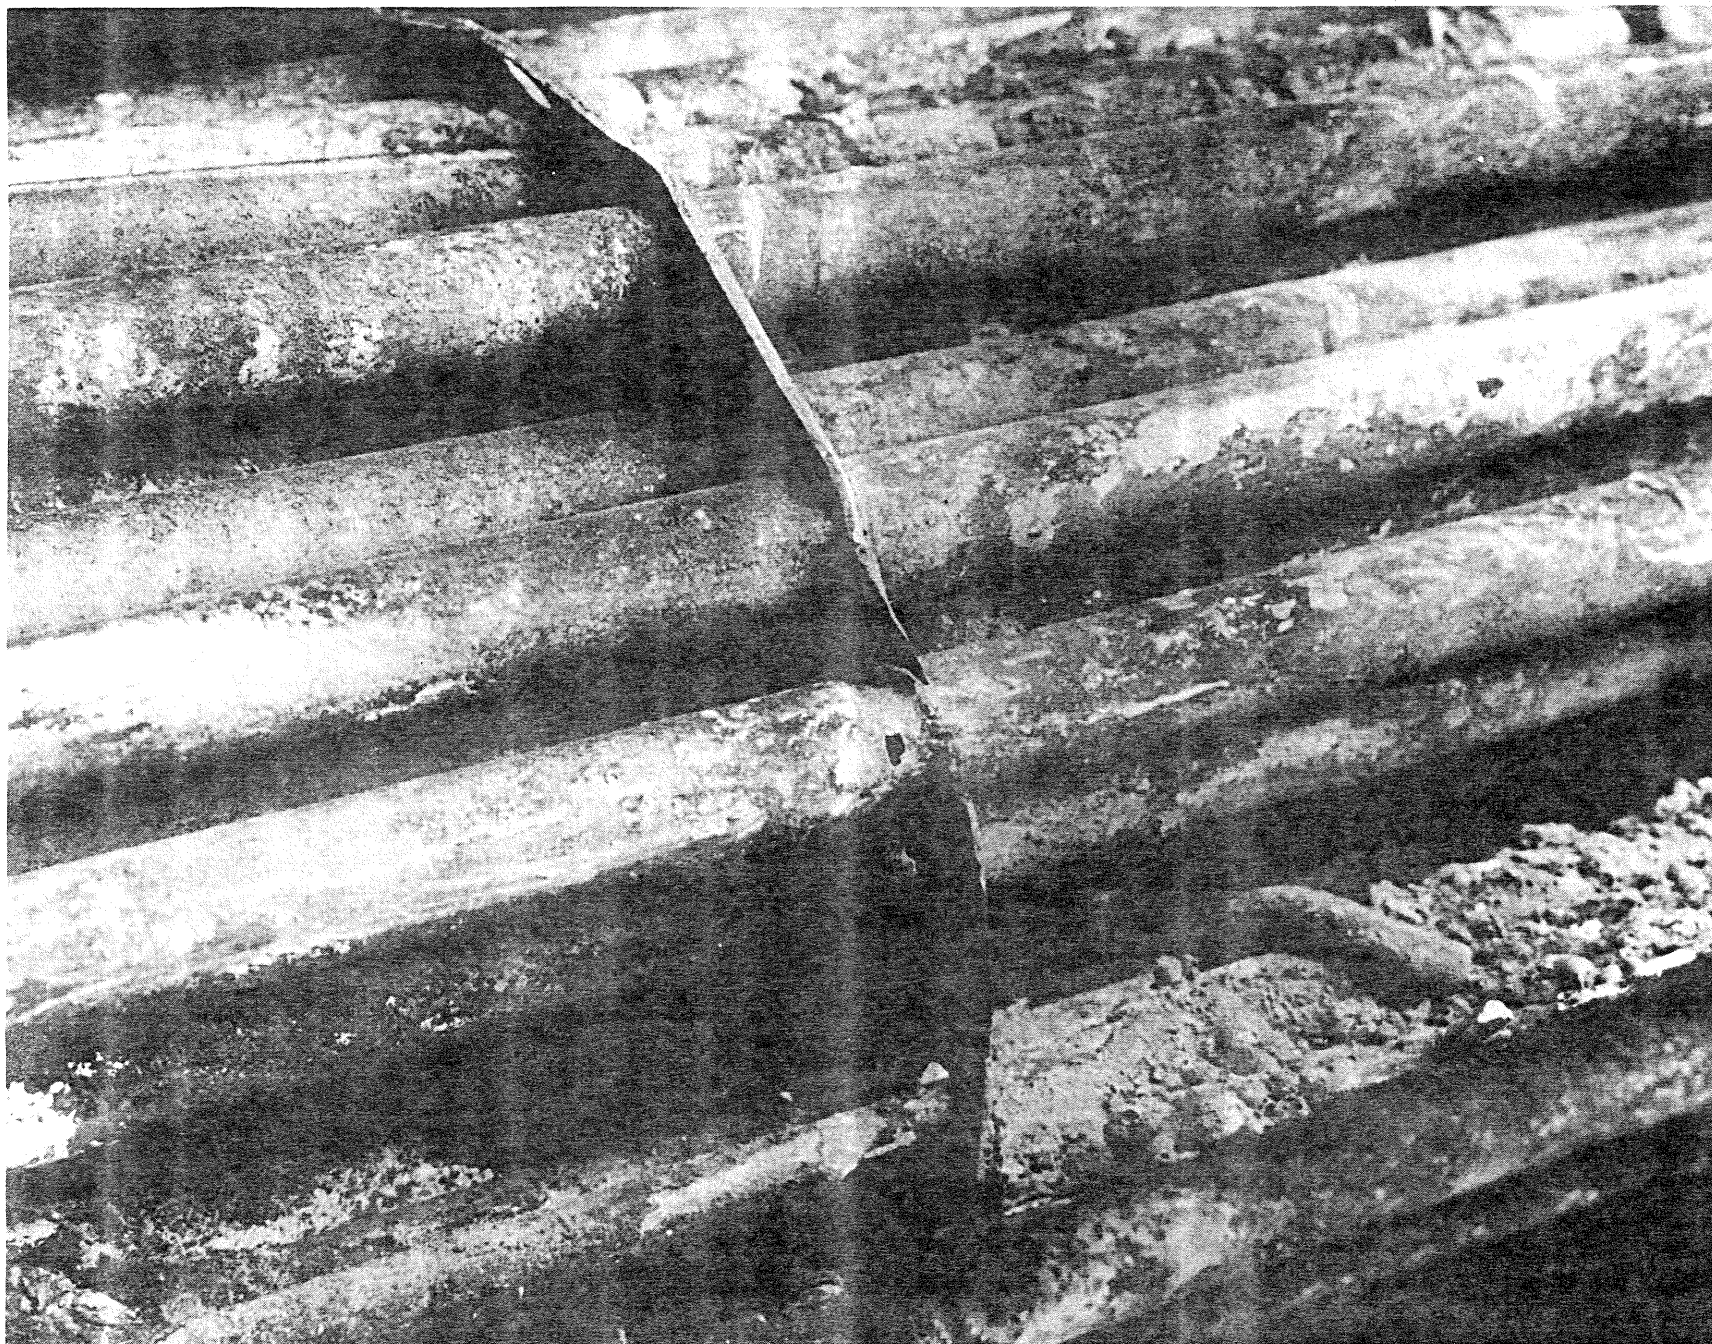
"Necked down tube in gas cooler HFE663A. This may be the point of the original freon leak."
